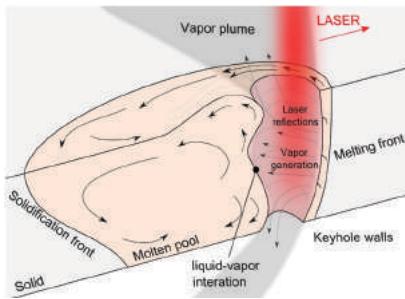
Keyhole creation and the molten steel pool during laser welding. The keyhole migrates as the laser moves along the seam between two sheets, with molten steel filling in the space around and behind it as it travels.
